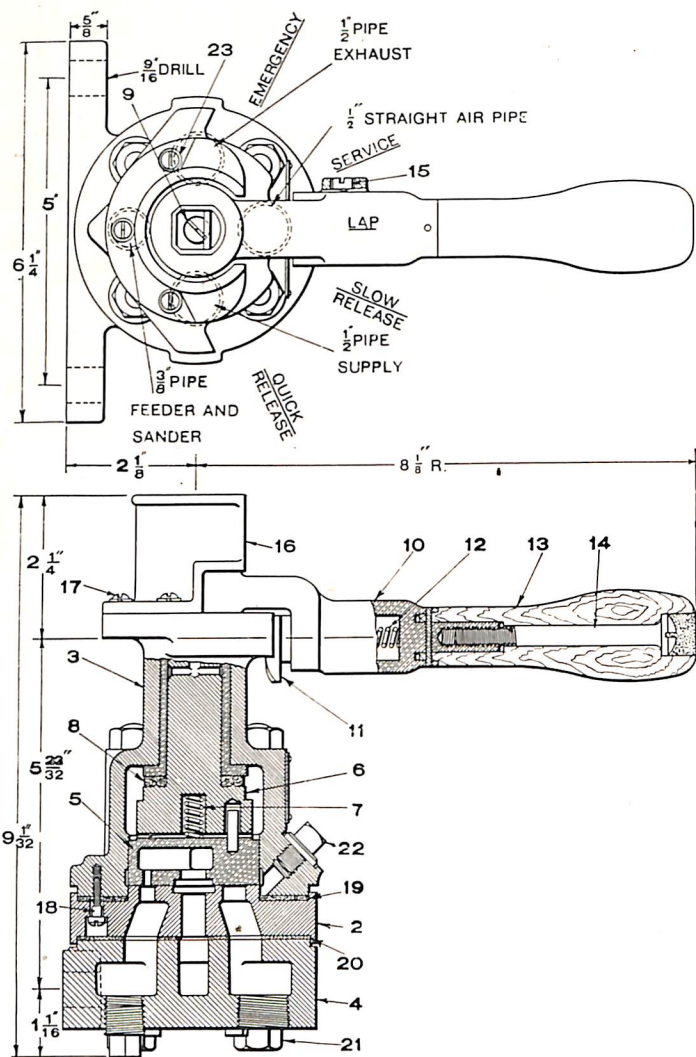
SX-2 Brake Valve Plan and Vertical Section
